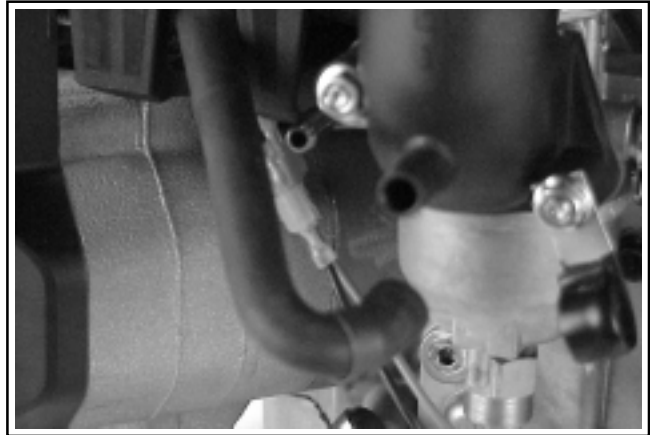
Removing Breather Hose from Air Cleaner Base.
